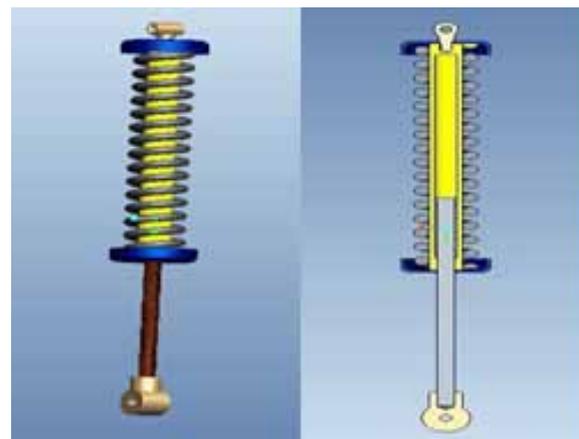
Assembly and front section of the Mac Pherson Strut Shock Absorber.
